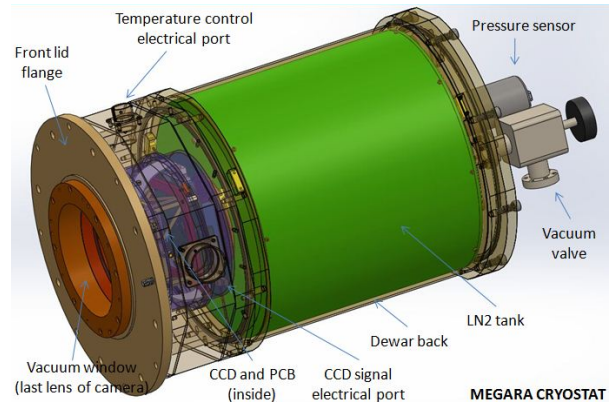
MEGARA open-cycle cryostat preliminary design. The complete assembly of the cryostat will have a length of 270 mm and a maximum diameter of 255 mm.
